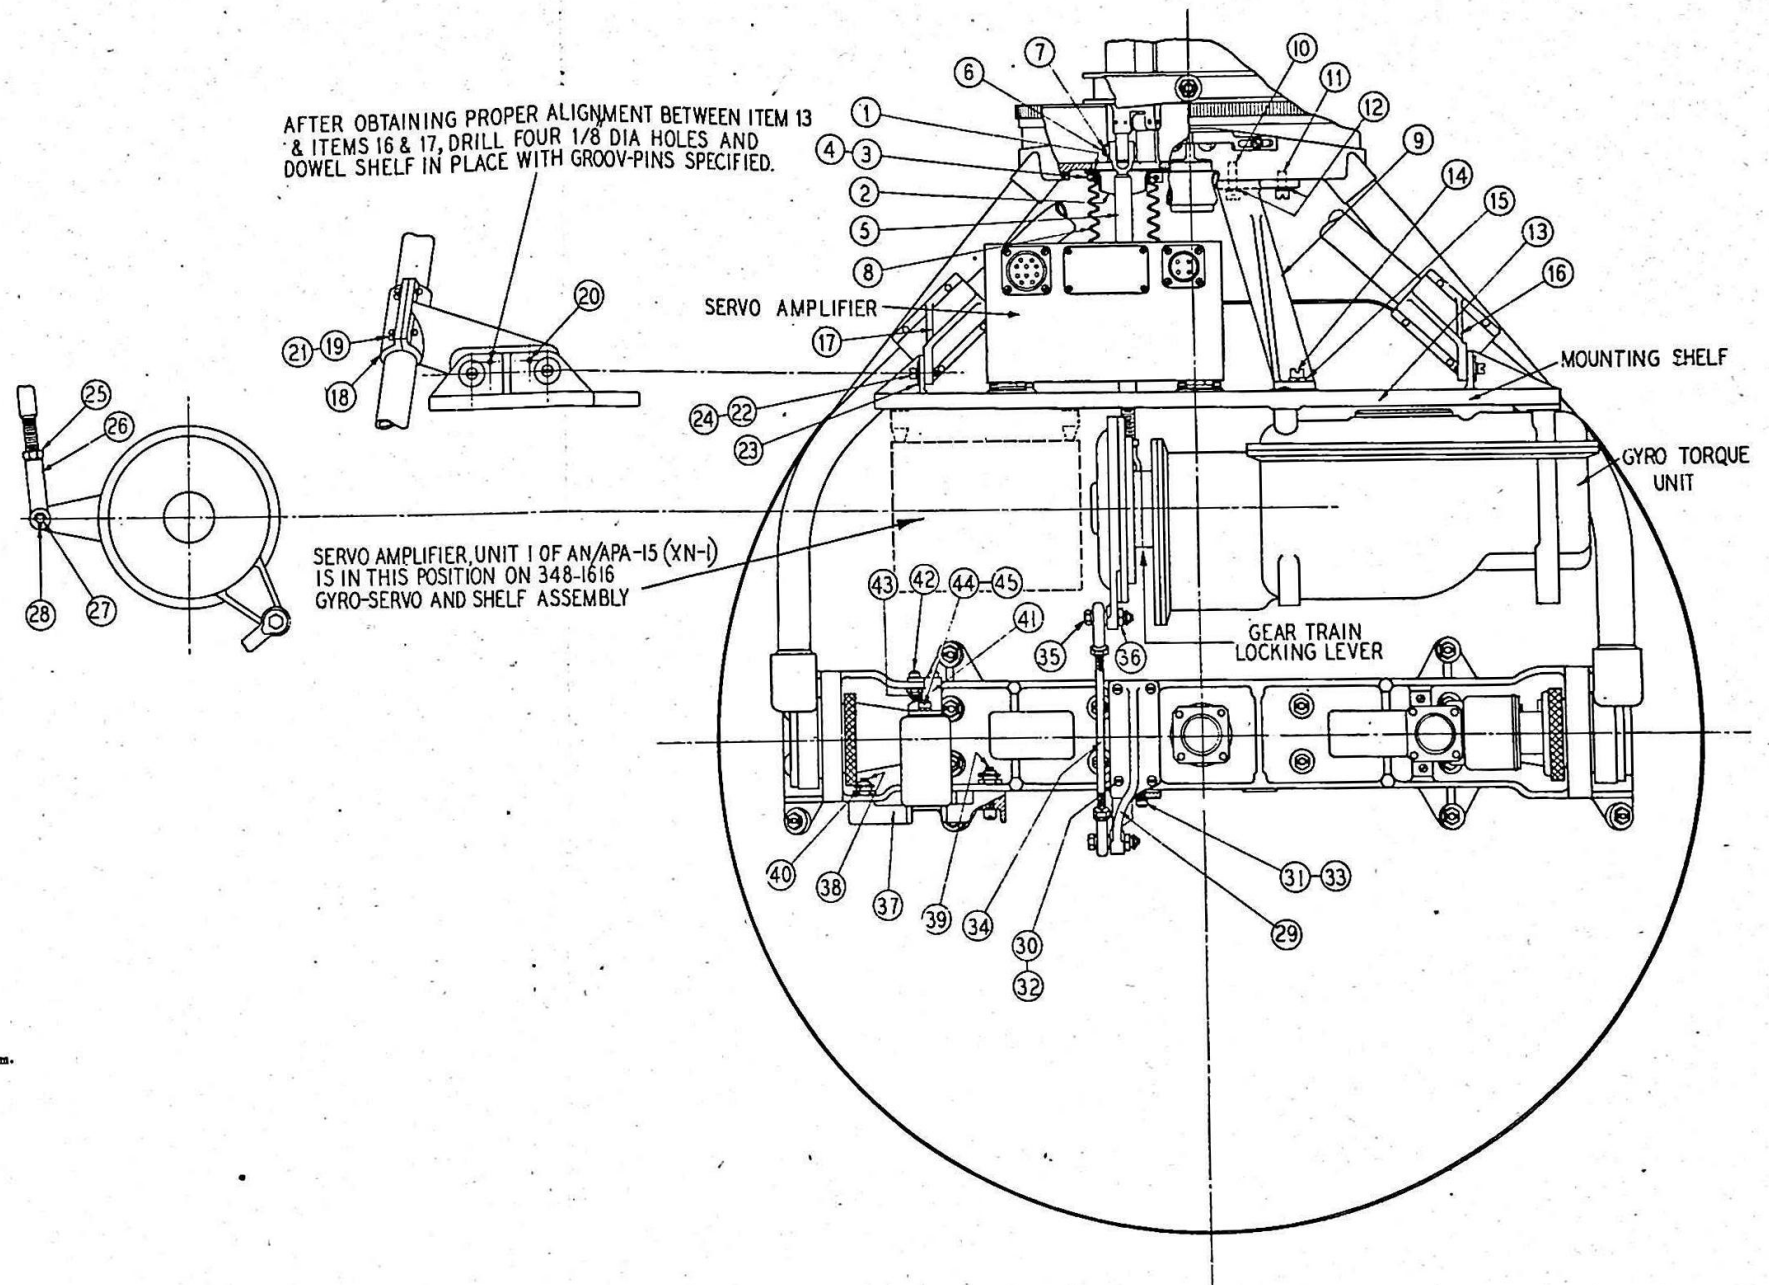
Tilt-Stabilization Kit AN/APA-15 or AN/APA-15(NX-1), Installation Details
